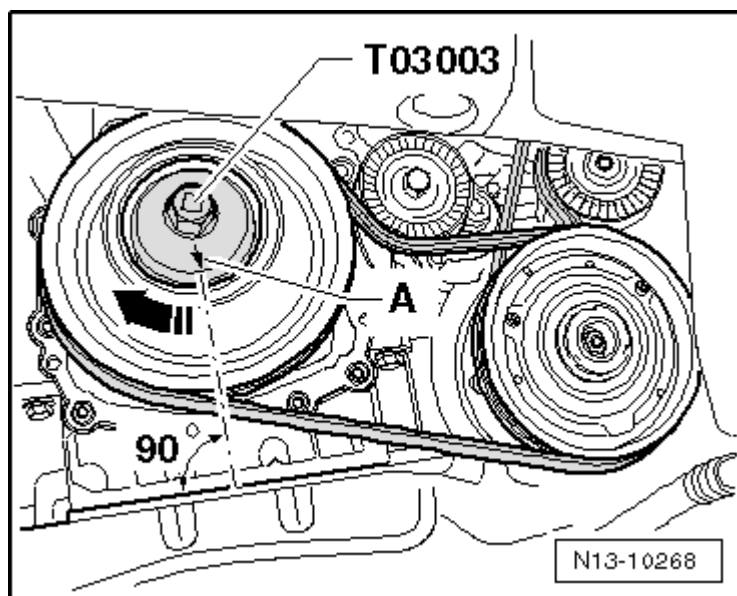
Attaching Wrench T03003 Onto The Vibration Damper Bolts
